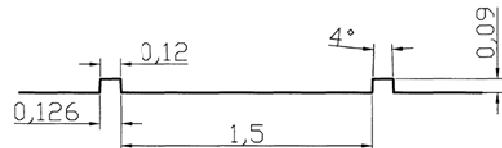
Detail of technical drawing of first embossing tool; made of steel, provided by BPE
